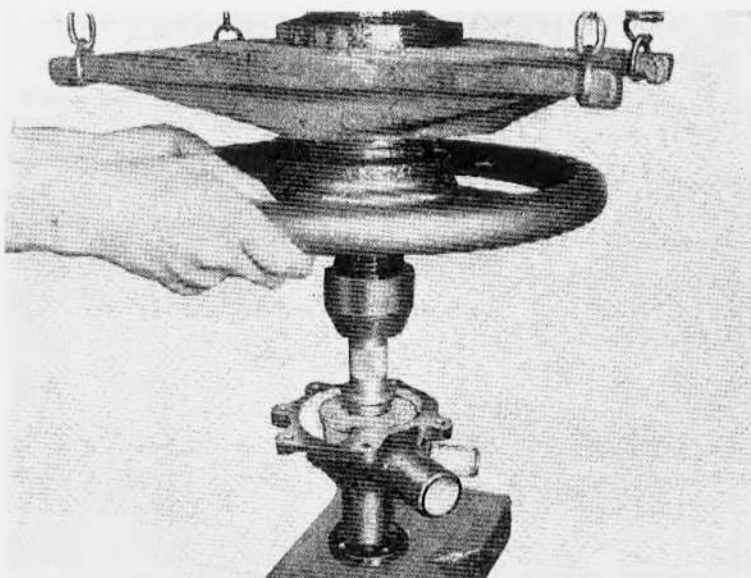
Installing Rotor and Seal Assembly onto Shaft
